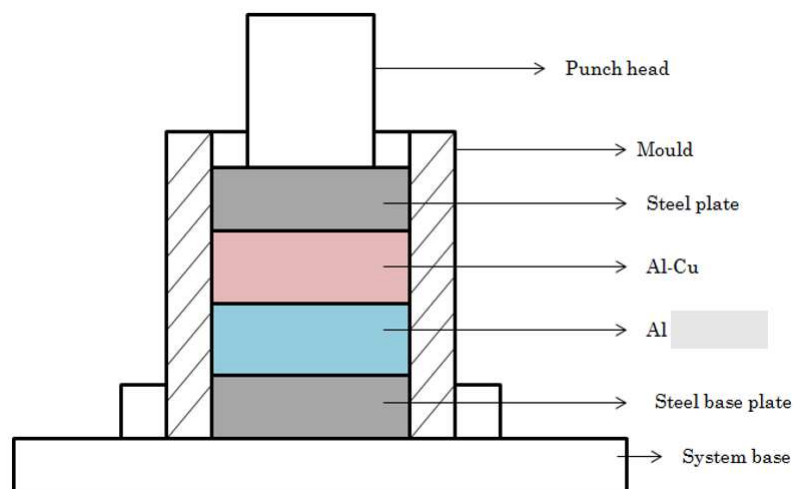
(b) – Diagram showing the set-up of the squeeze casting mould during the solidification stage
